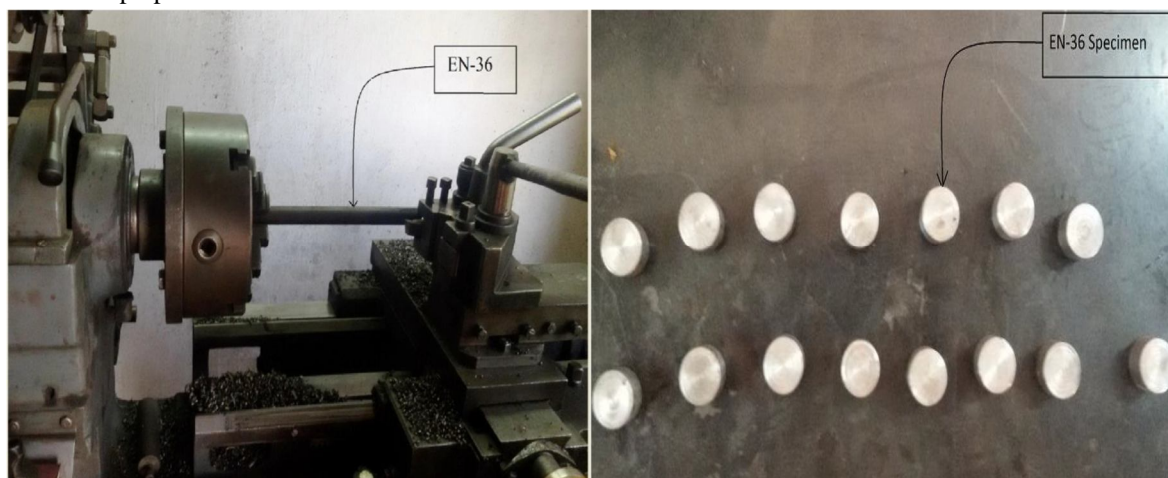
Preparation of work piece on lathe and Specimen after cutting on lathe machine
